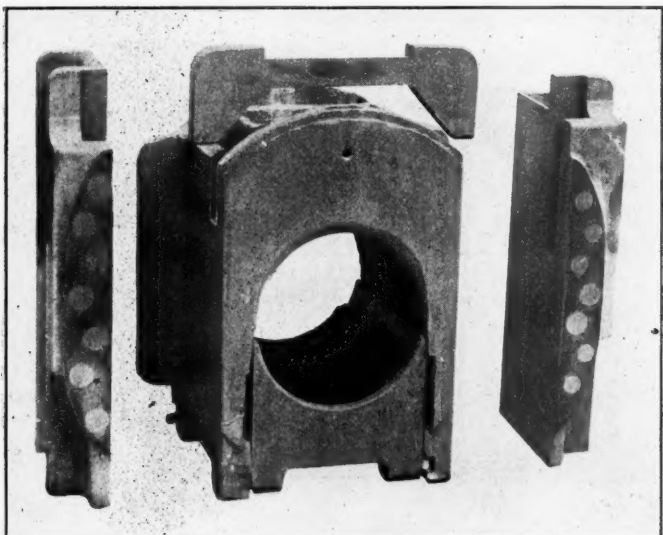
Improved Locomotive Driving Box; Showing Its Construction.
